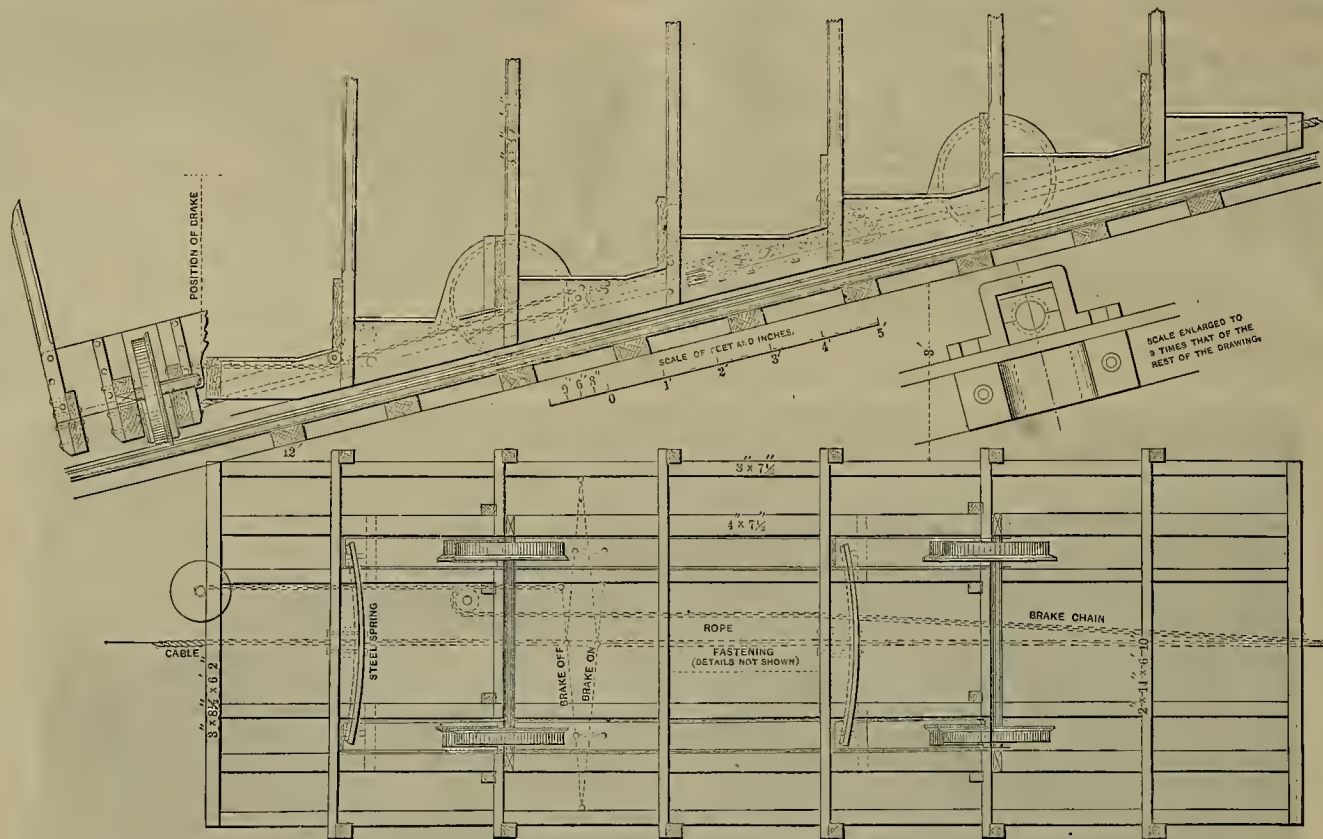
DETAILS OF BRAKE FOR CAR USED ON INCLINE.
